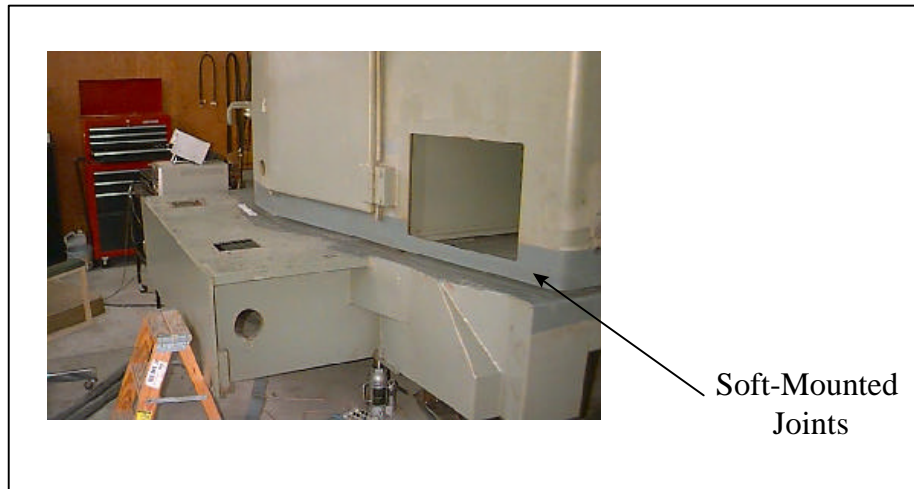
Welded Joints Eliminated for Soft-Mounting the Cab
